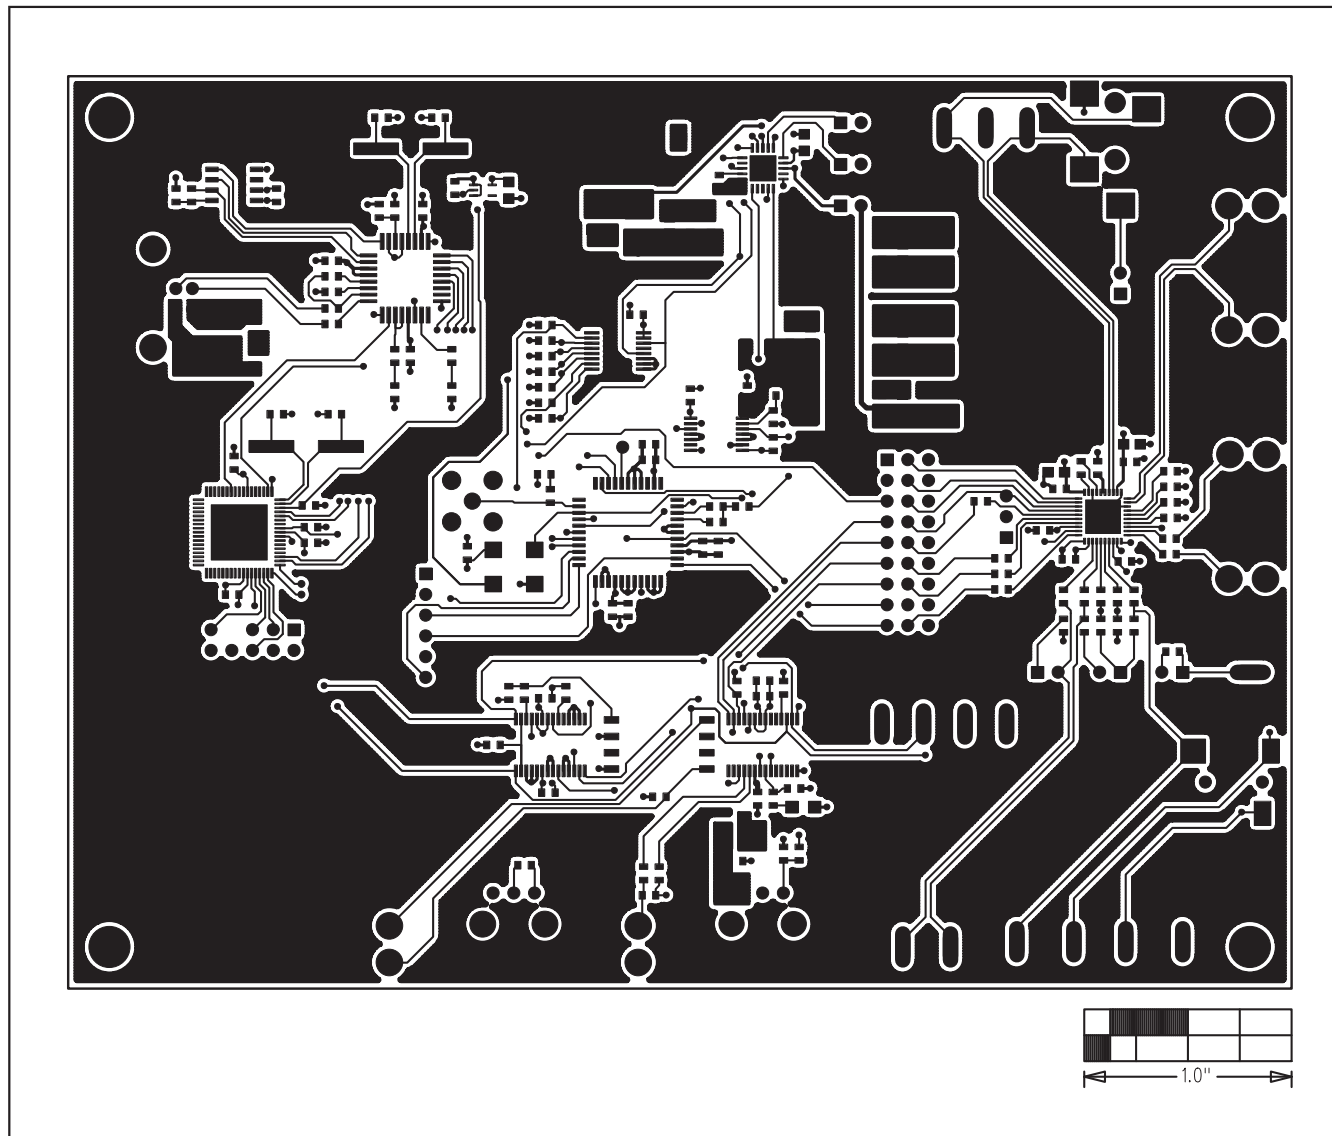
MAX9856 EV Kit PCB Layout—Component Side
